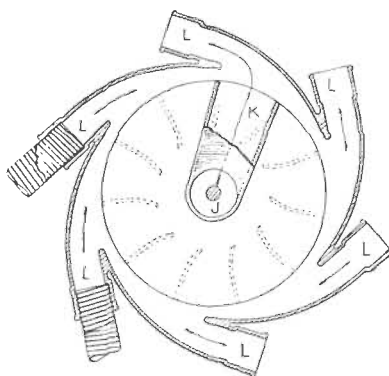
A sectional view of centrifugal discharge fan and fan housing.
